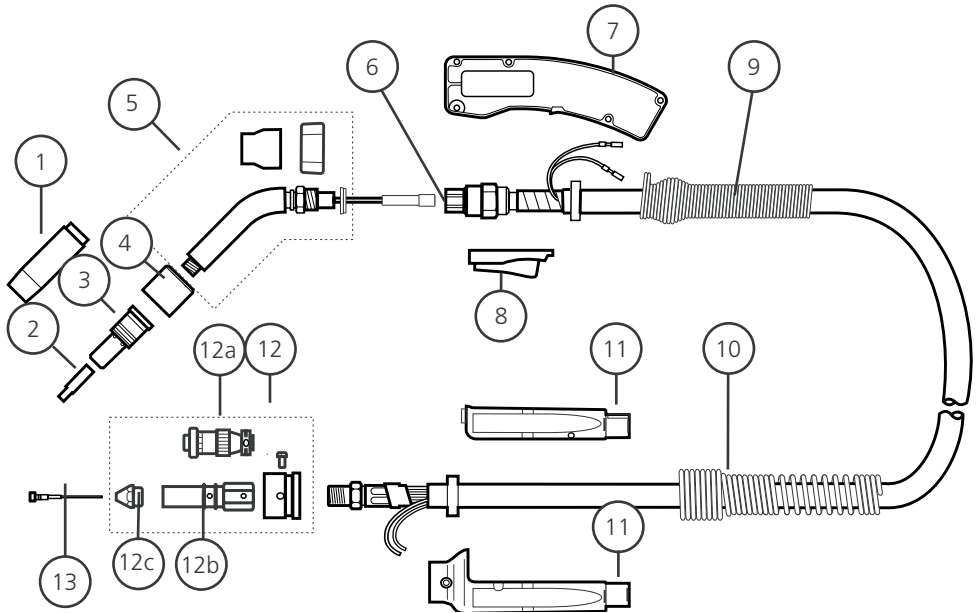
BEQ4012AR7EM (400 amp) Gun and Cable Assembly
